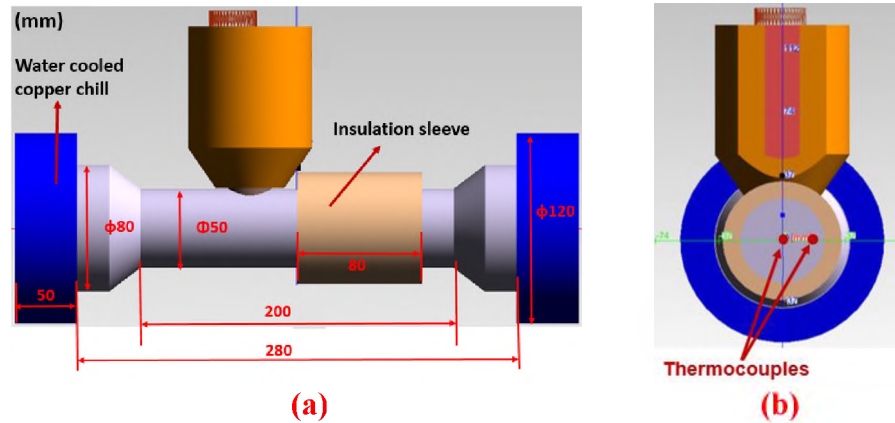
(a) Schematic of the mold and casting design (front view) and (b) the last solidified cross section in insulation area with the positions of the simulated thermocouples.
